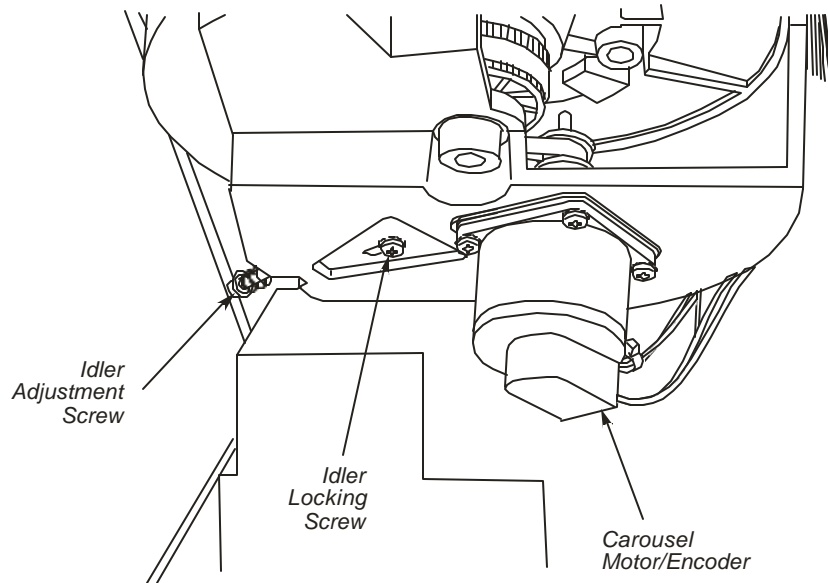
8 Location of the Carousel Motor, Idler Adjustment Screw, and Idler Locking Screw
